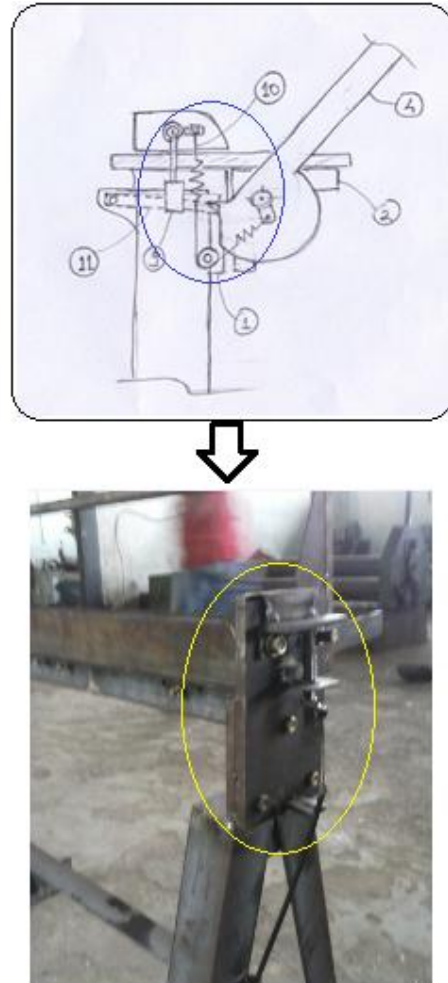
Necessary modification involving spring and steel wire (marked with circle) to accommodate clamp-release mechanism.
